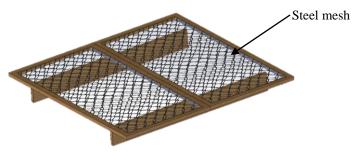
Drying racks of drying chamber. Support for the racks still needs to be finalized. Slots in the exterior drying chamber walls will be made to slide the racks in and out.
